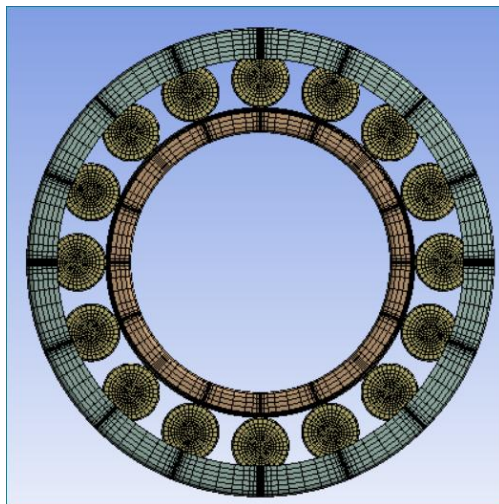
NU210 Cylindrical roller bearing Solid-FEM model.
